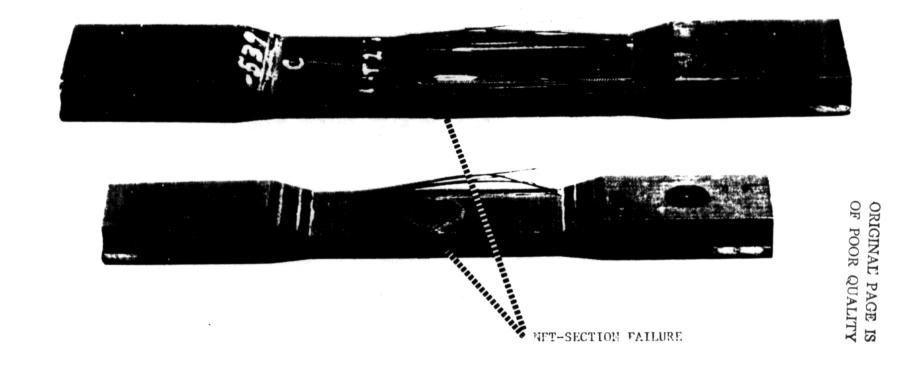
UNLOADED HOLE TENSION TEST - NET-SECTION FAILURES
